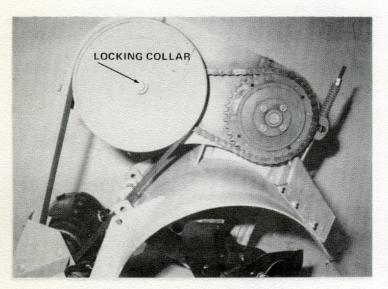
PULLEY & SPROCKET ASSEMBLY REPLACEMENT
